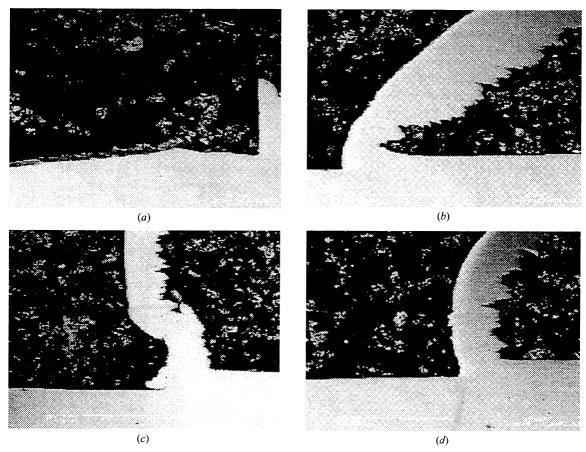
(a) through (d) Macroscopic morphology of the chips of PM 316L steel in the low cutting speed range.
